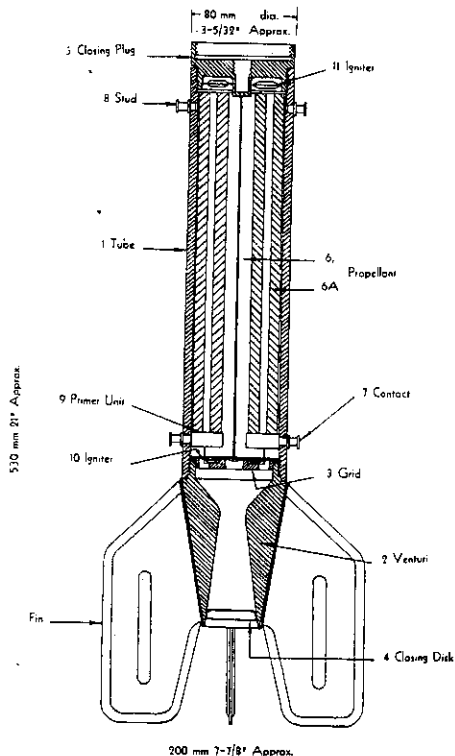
Drawing of rocket motor for 8-cm HE projectile.
